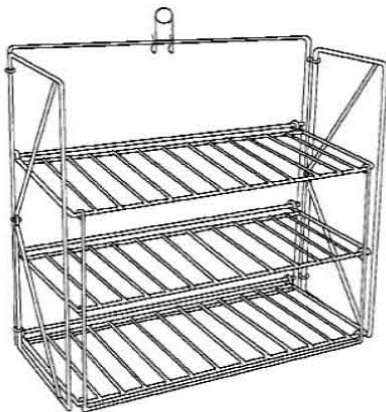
Example of a design for a collapsible superposed wire-shelved unit.
